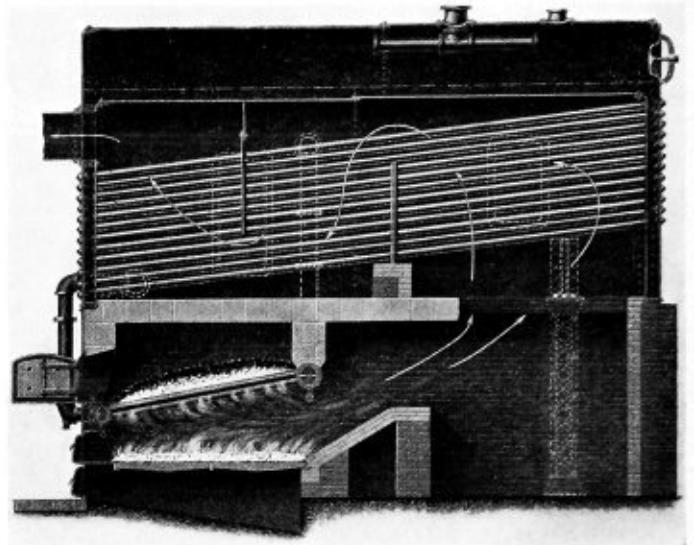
Oswego Watertube Boiler with Hawley Down Draft Furnace
